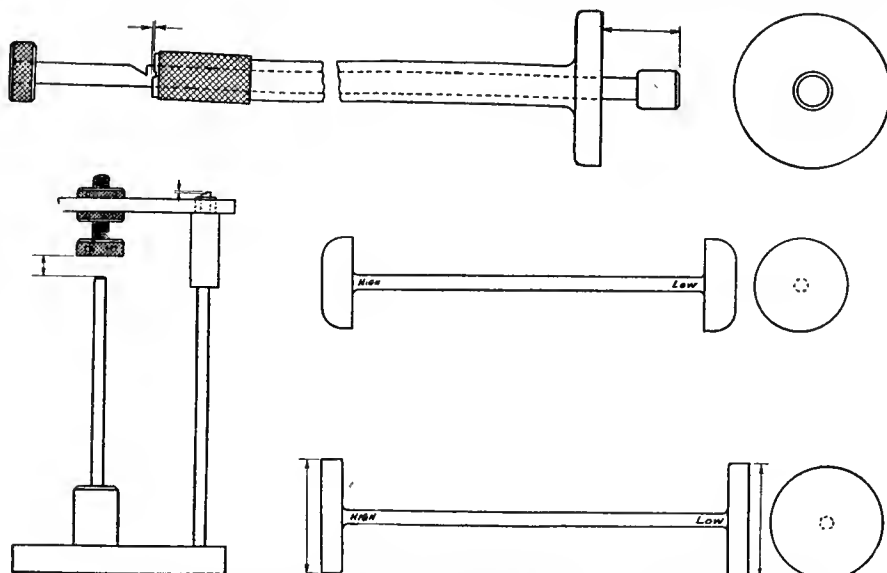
GAUGES USED IN THE MACHINING OF SHRAPNEL SHELLS.
